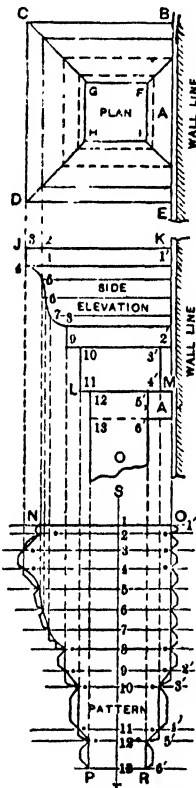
Plan, Elevation and Pattern with Lap for Side of Leader Head
